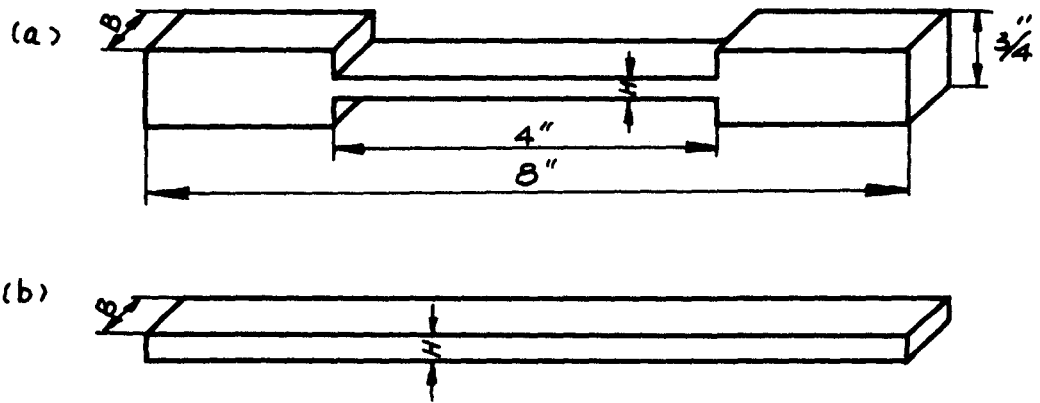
Beam specimens. (a) large end specimen; (b) flat end specimen.
